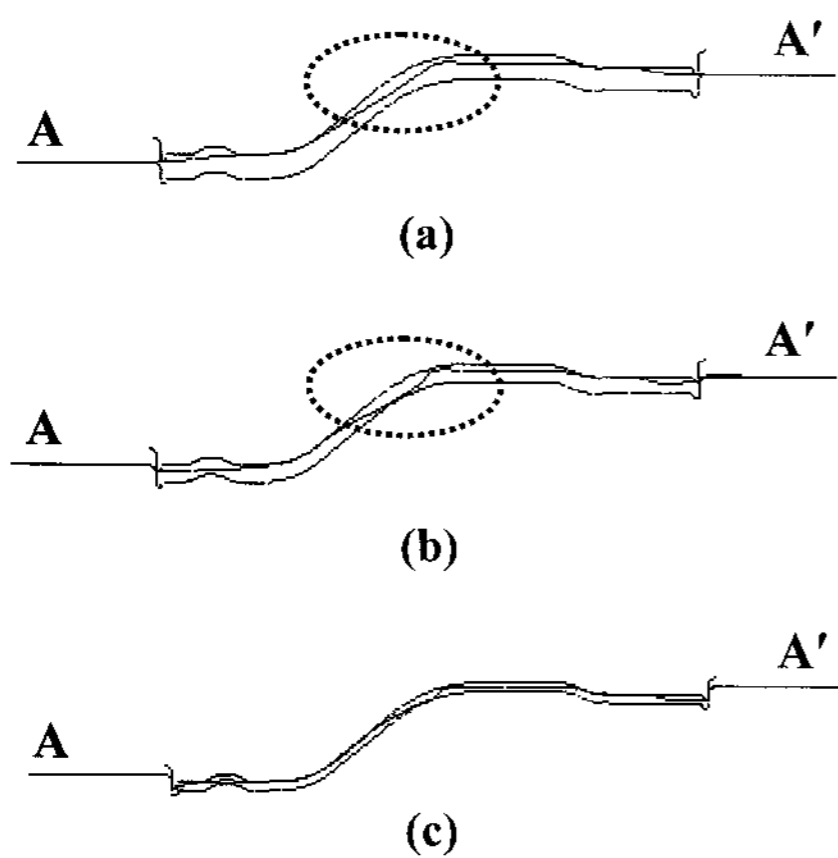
Cross section shape of the blank and the tools along the section A-A' before forming completion by (a) 15.2mm; (b) 10.2mm; (c) 5.2mm
